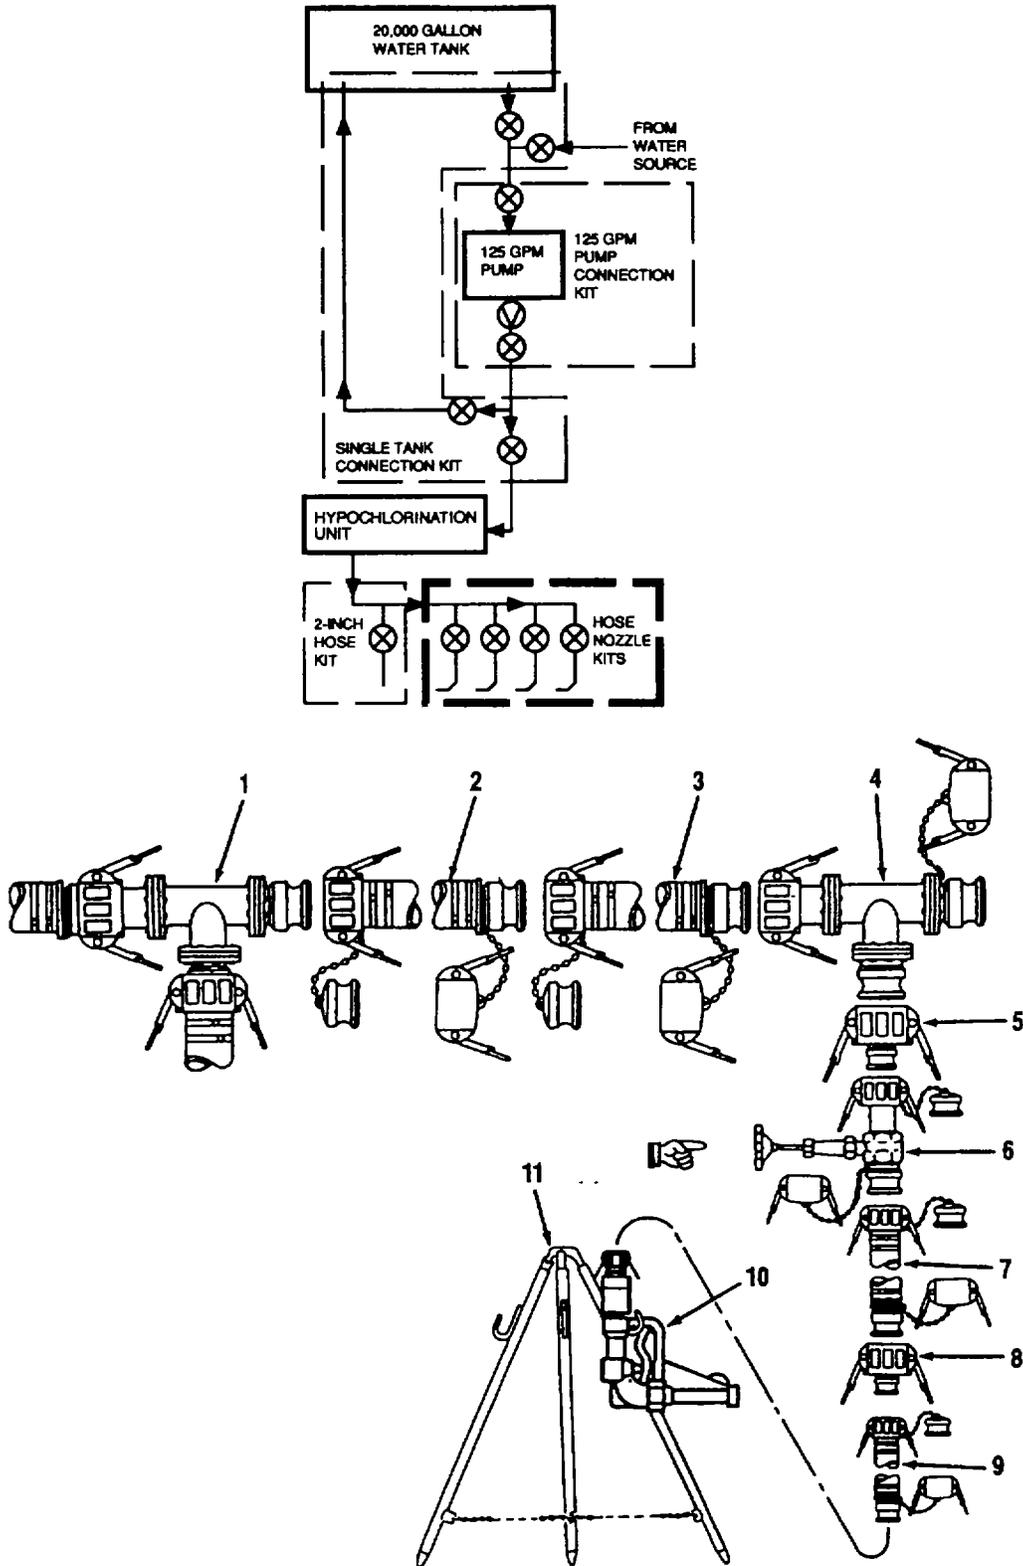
Hose Nozzle Connection Kit Disassembly
